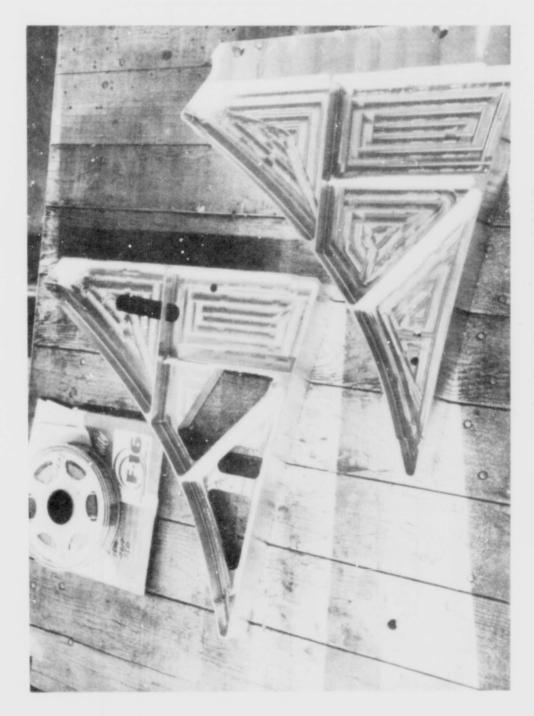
RTC/NC MACHINED PART - 16B1262
